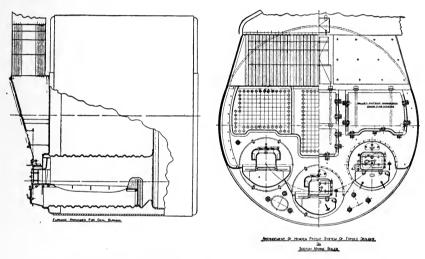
Arrangement of Howden system of forced draft on Scotch boiler. (Coal).
